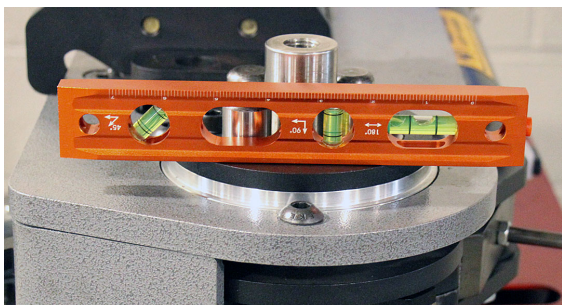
Spindle Leveling - Socket Head Cap Screw Removed
